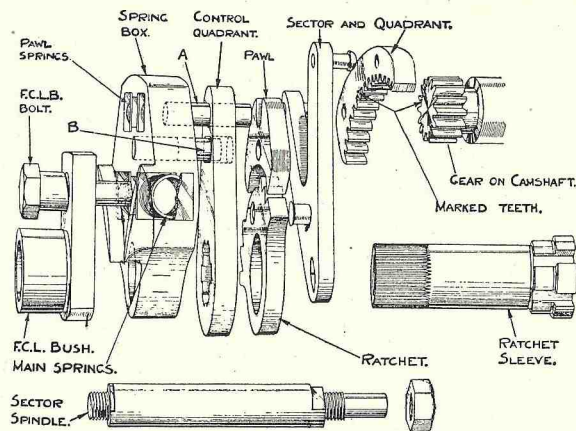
EXPLODED VIEW OF THE FOOT GEAR-CHANGE MECHANISM (BA AND CP TYPE).
